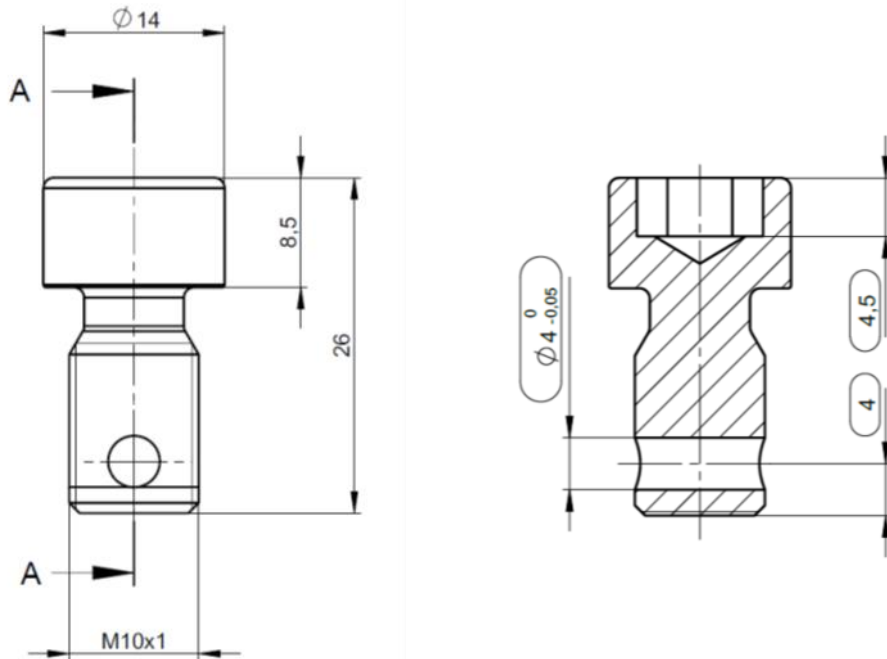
DIMENSIONS OF THE MUTARS® SCREW FOR CONNECTING PART
